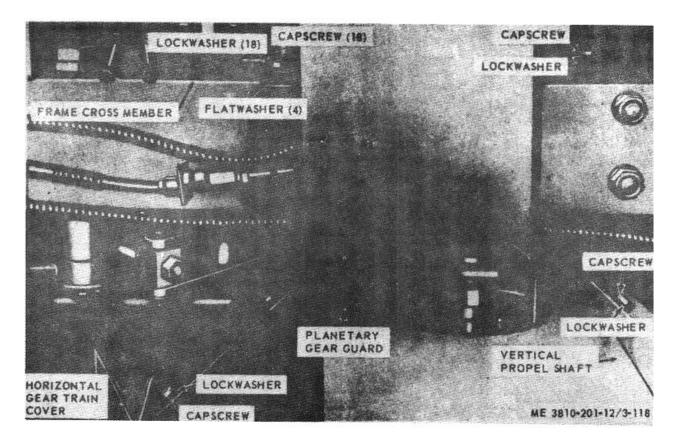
Vertical propel shaft guard, planetary gear guard, and horizontal gear train cover, removal and installation.
